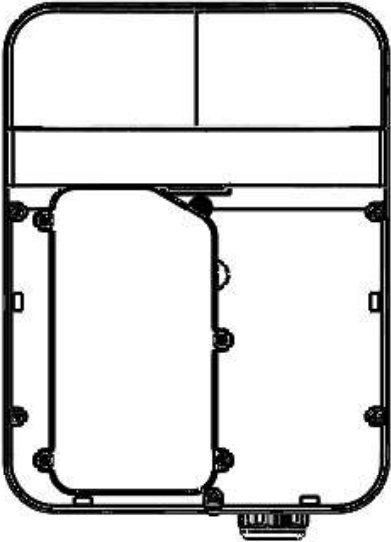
Loosen 5 pcs M4 screw then open Install cover.
